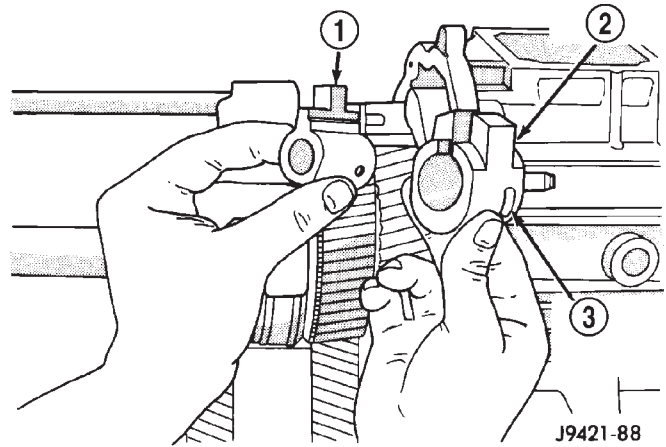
SHIFT SHAFT LEVER AND BUSHING
